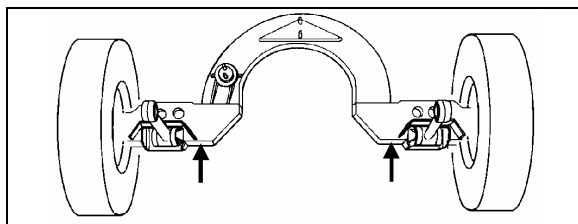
JACKING POINTS ON TAG AXLE OEH3B764
